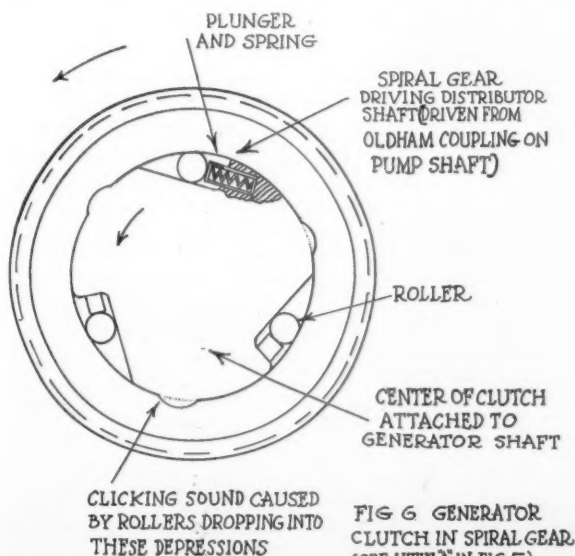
GENERATOR CLUTCH IN SPIRAL GEAR (SEE VIEW A IN FIG. 5)
